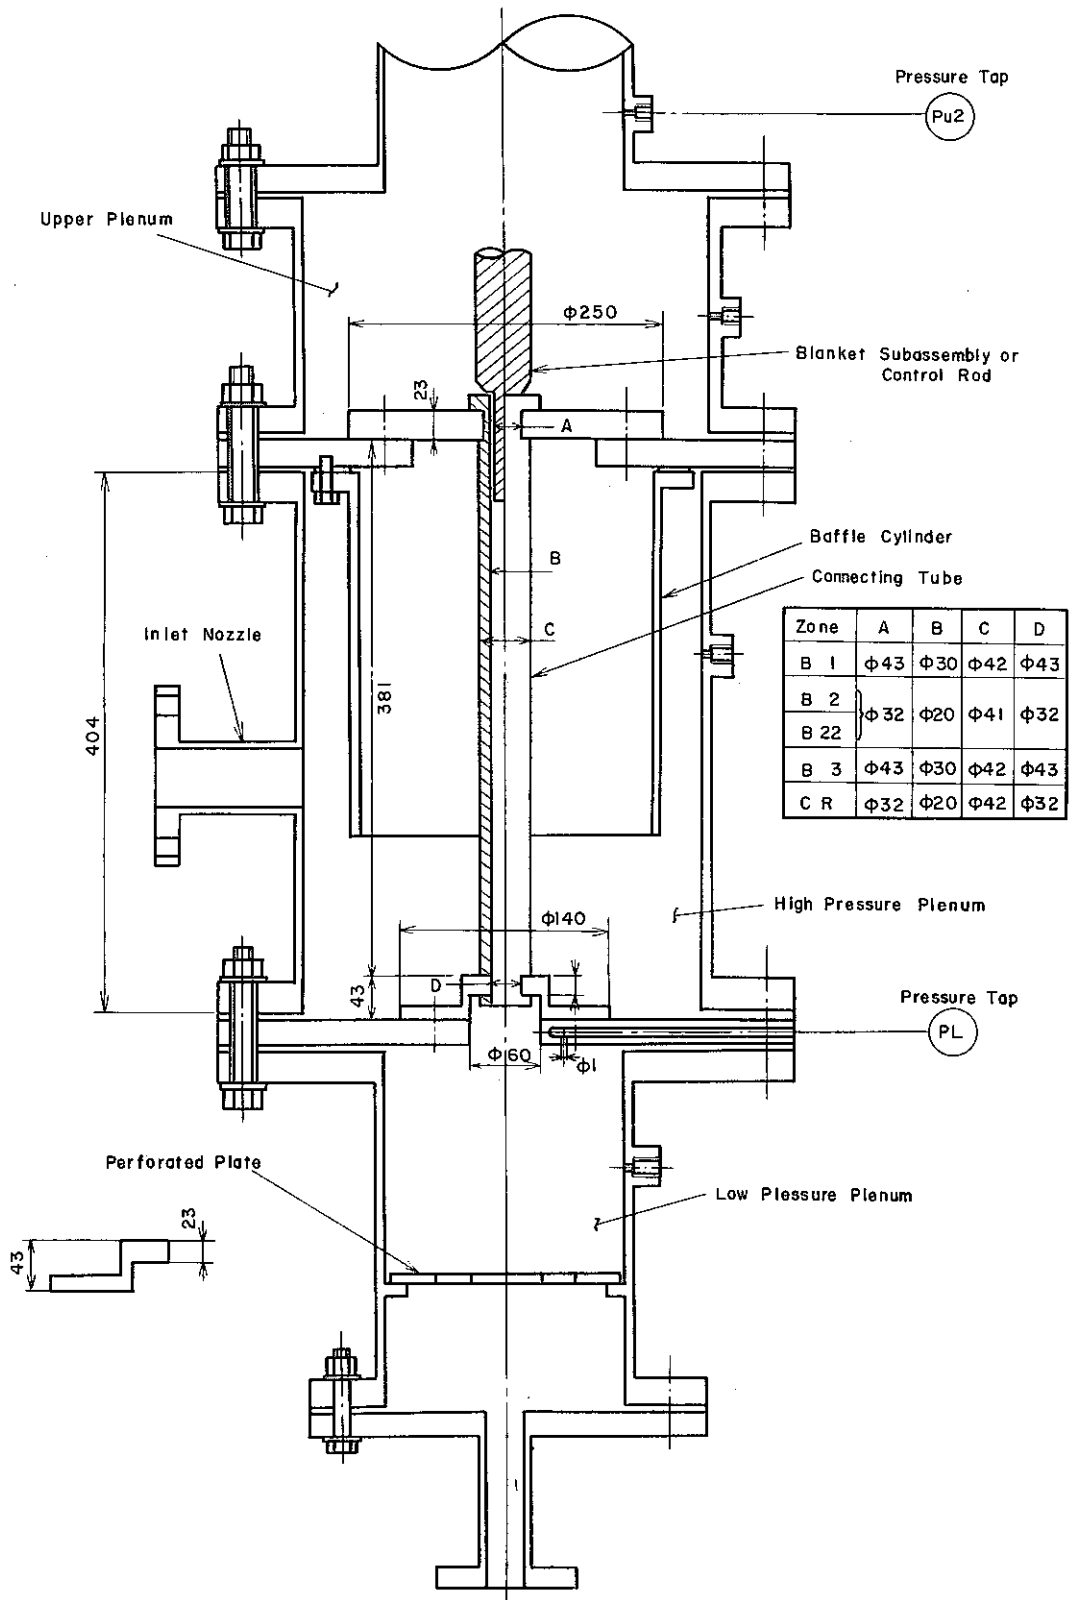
Installment of the Blanket Subassembly and the Control Rod
